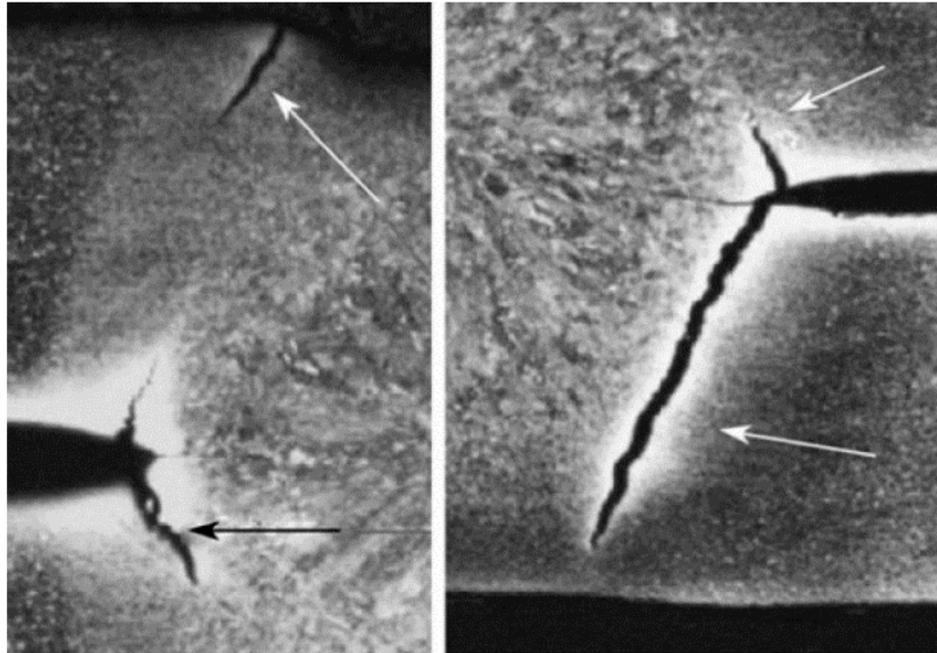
Appearance of cold cracking in the heat affected zone of spot welded DP780 (0.15%C). Reprinted with permission from M. Hardy // *Adv. Manuf.* 1 (2014) 28. © 2014 Springer.
